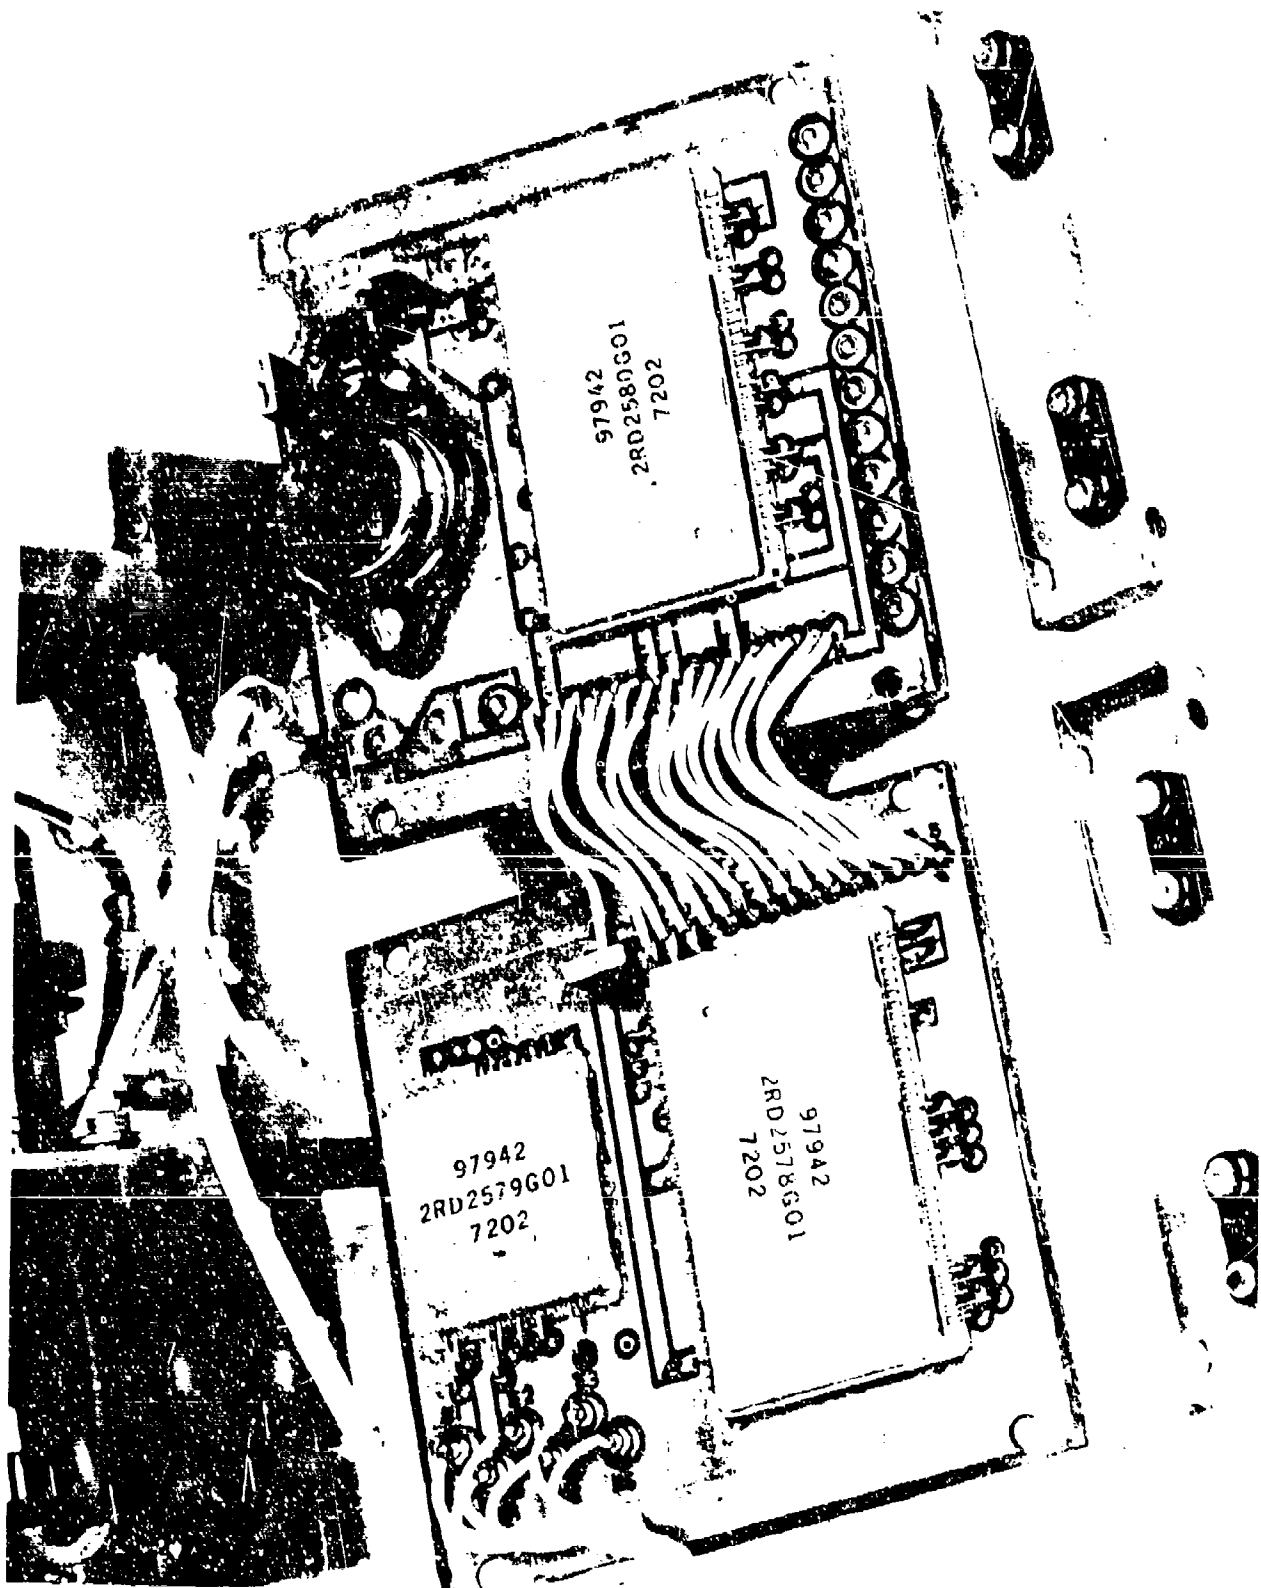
Remote Lens Multichip Hybrid Package Assembly
